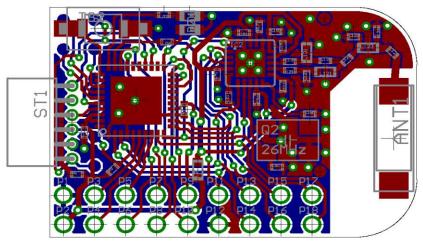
eZ430-RF2500T, Target Board, PCB Layout
